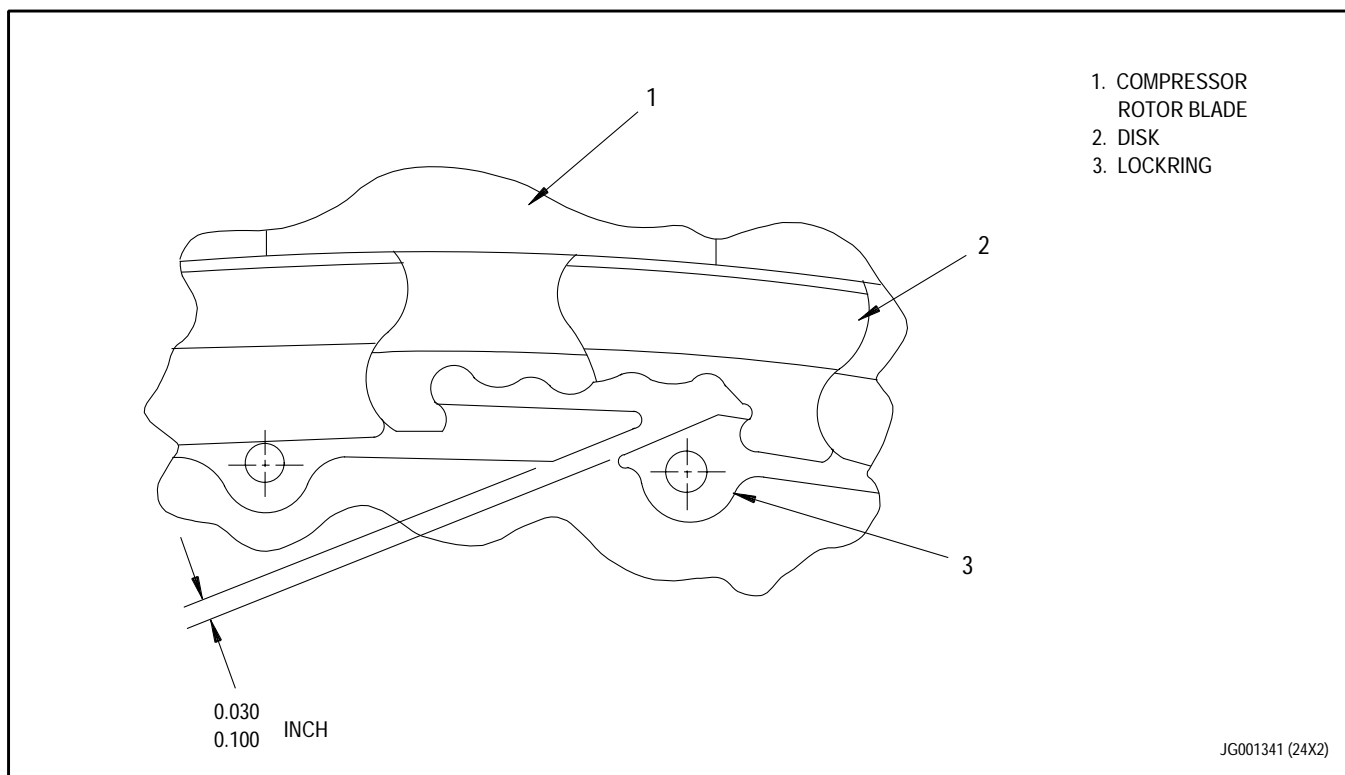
Fourth and Fifth Stage Blades - Lockring Measurement (Typical)
